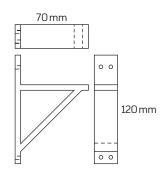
Orthographic drawing of a redesigned shelf bracket
